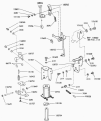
EXPLODED VIEW OF THE MECHANISM AND ITS MAIN PARTS.
